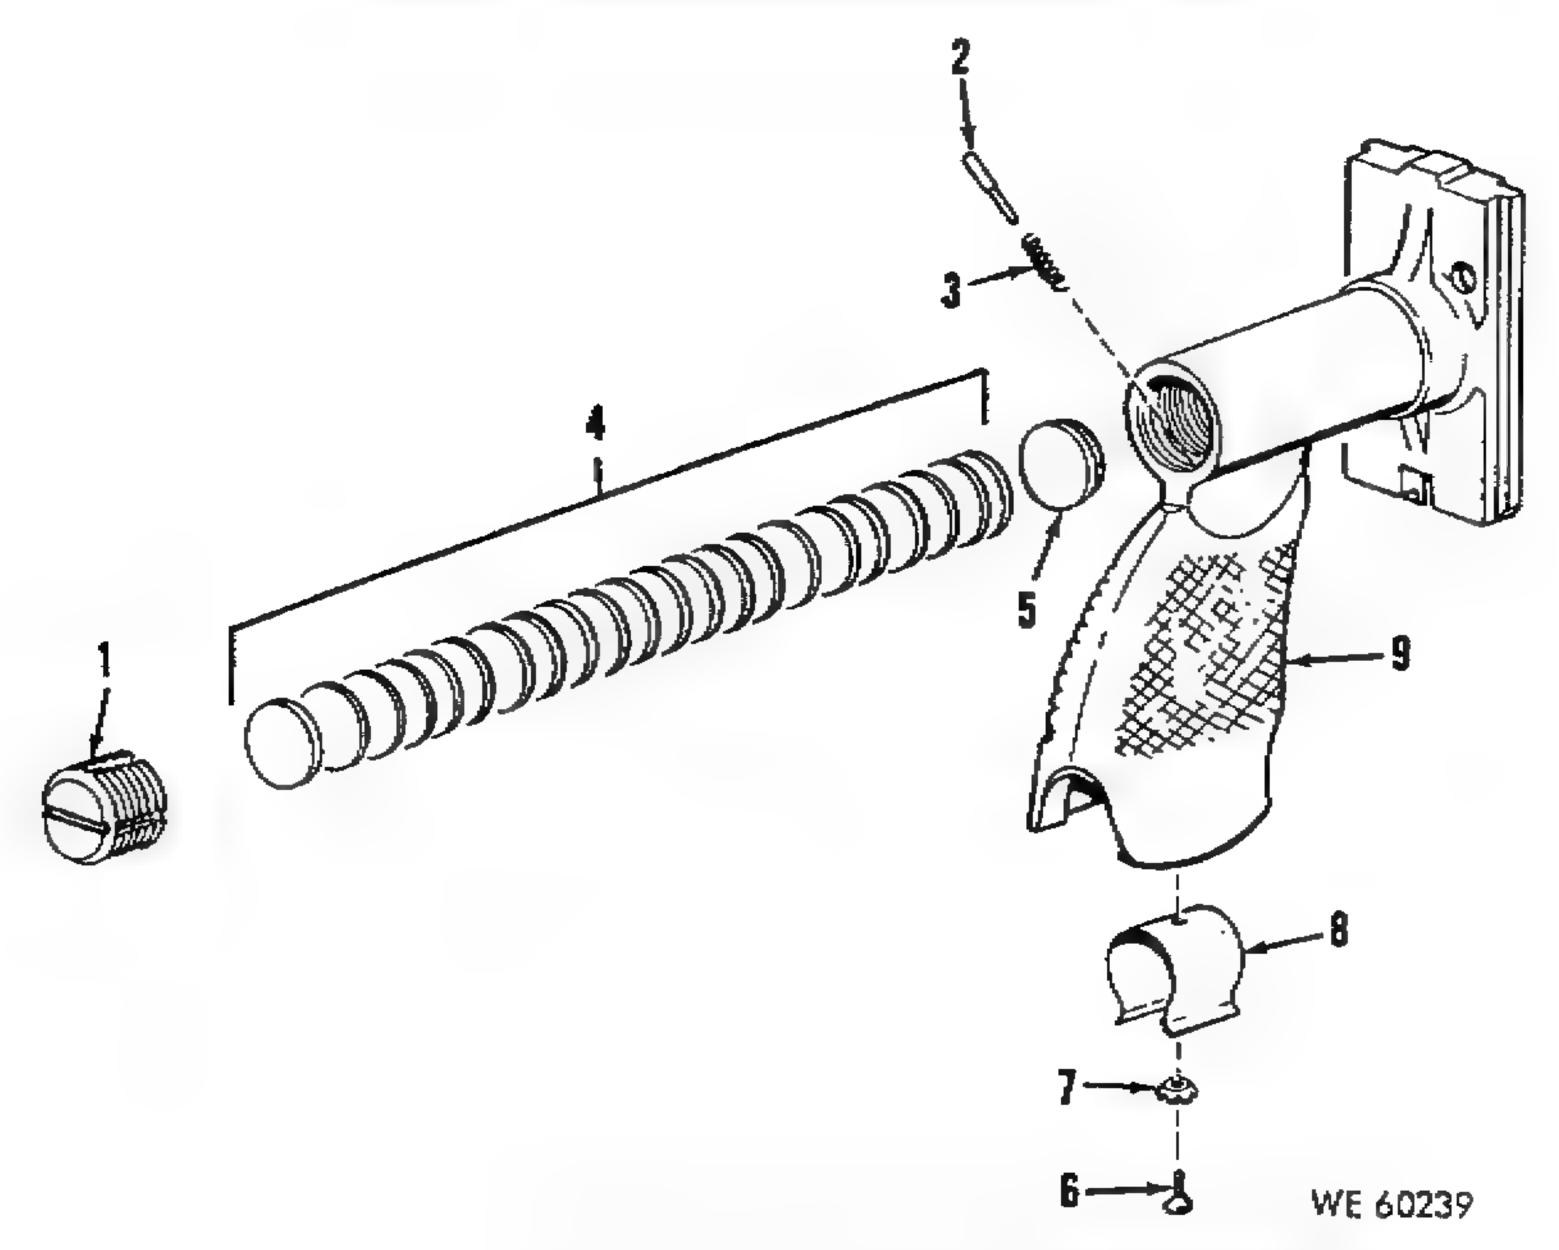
Back plate assembly for Caliber .30 Machine Guns, M1919A4 and M1919A6 only—exploded view.
